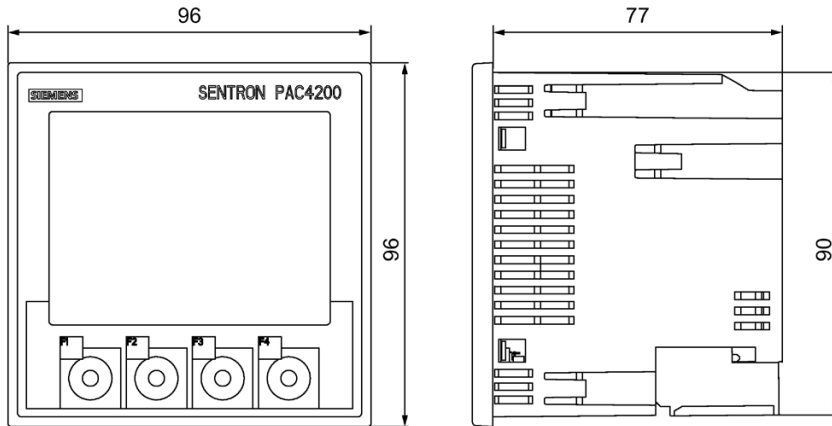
Frame dimensions with optional PAC PROFIBUS DP expansion module connected, device with screw terminals
